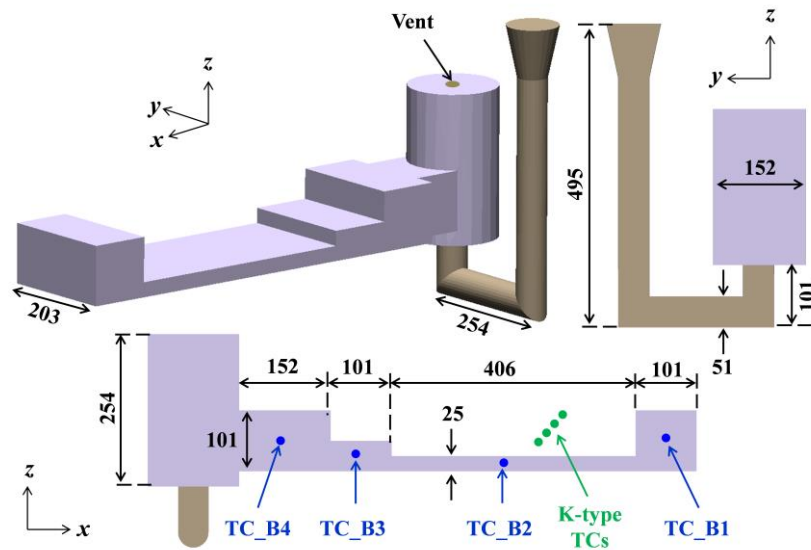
Mn-steel casting geometry used in the experiments; the dimensions are in millimeter (mm).
